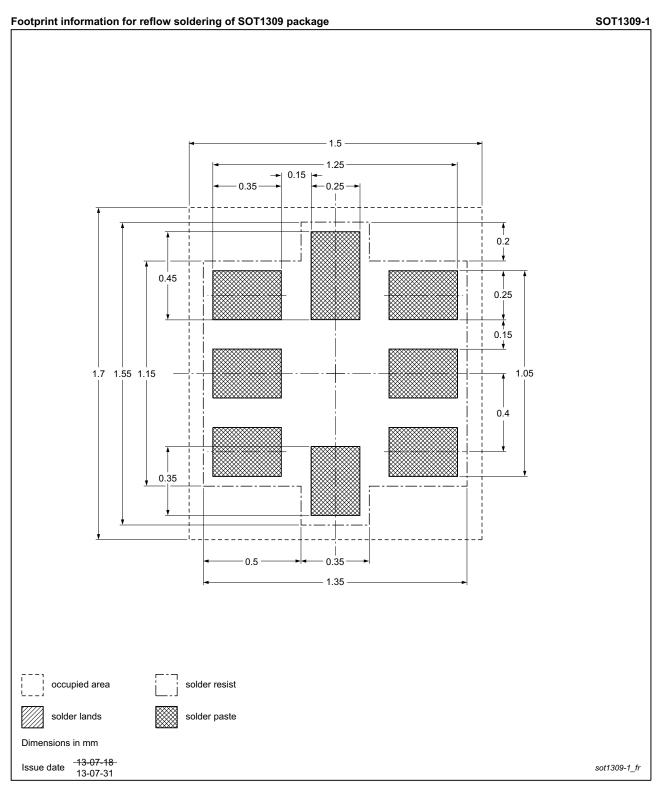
PCB footprint for SOT1309-1 (XQFN8); reflow soldering
